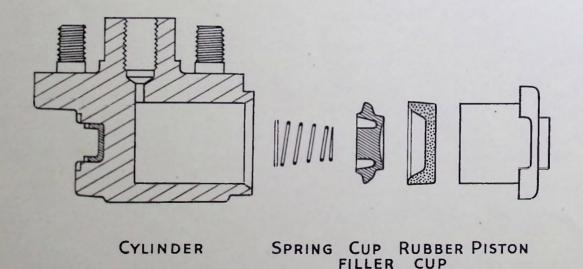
Exploded view of Front Wheel Cylinder fitted to later Productions.
